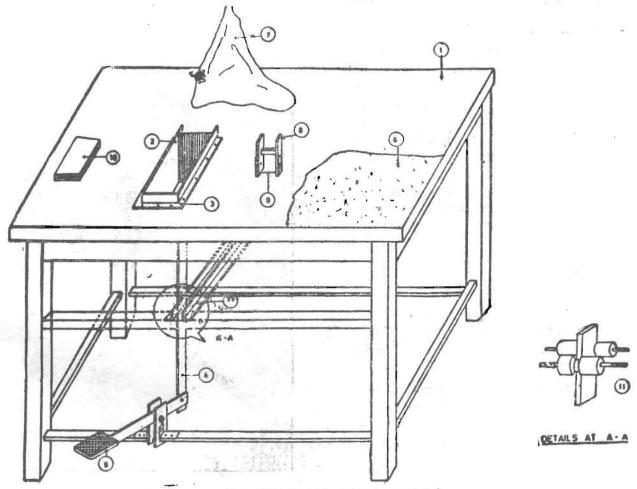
HAND MOULDING TABLE (ASSEMBLY DRAWING)
